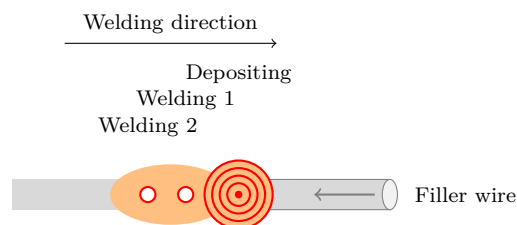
Proposed improvement of a combined beam figure: The welding steps should be closer together to enable welding in a larger but single weld pool.
